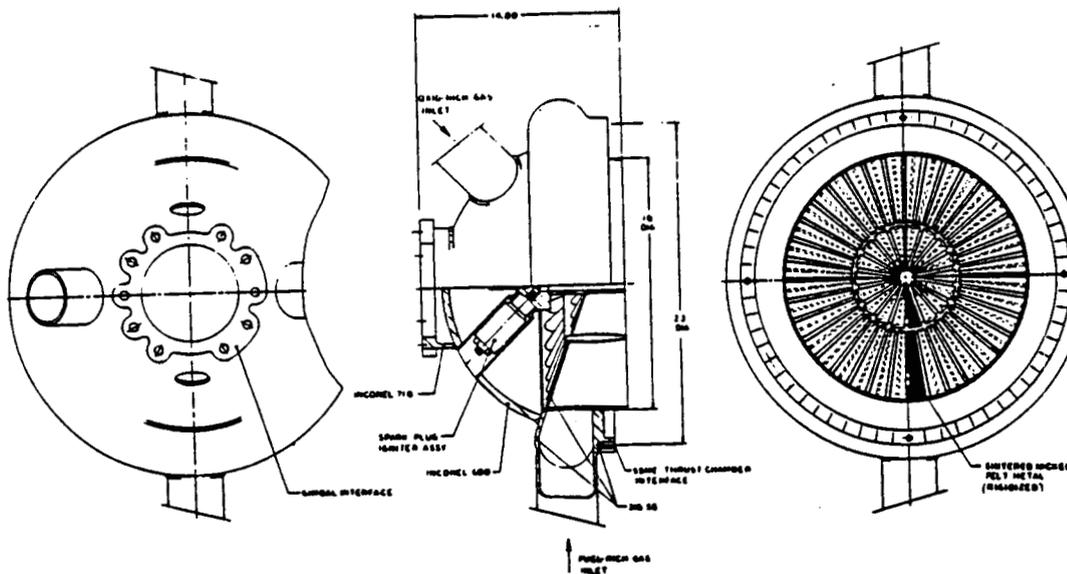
Injector Assembly Diagonal Plate (Gas-Gas)
